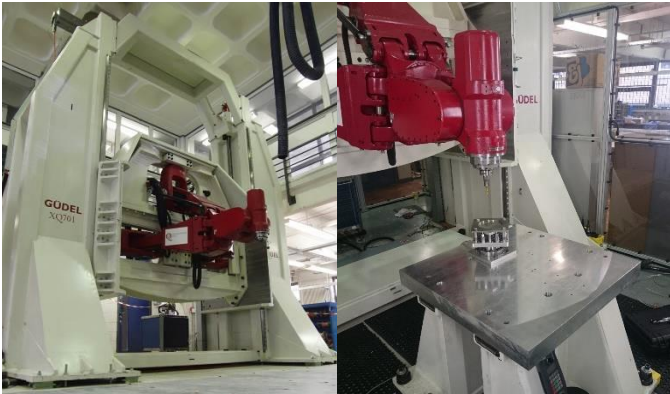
Güdel Exechon XQ701 HPKM platform and machining table
